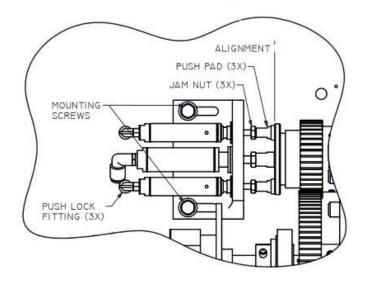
Push Pad Cylinder Assembly and Alignment
